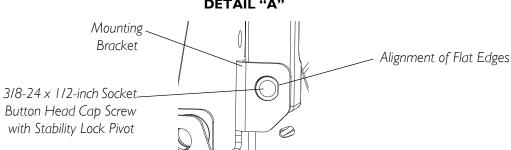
REMOVING/INSTALLING THE REAR SPRING MOUNT
